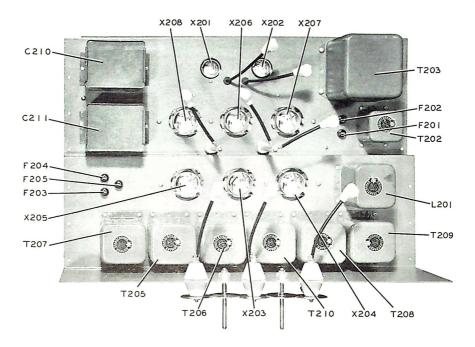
Power Supply Cabinet Rectifier Chassis, Top View
